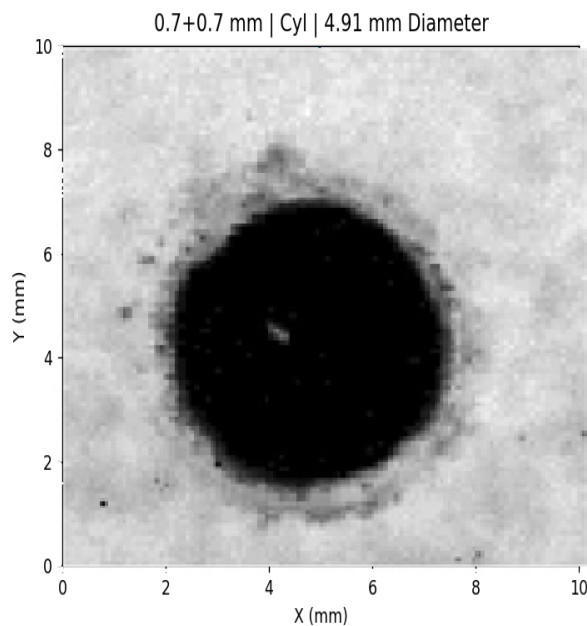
An acoustic microscope scan taken of a spot weld. The user can visually identify the boundaries of the weld nugget.
